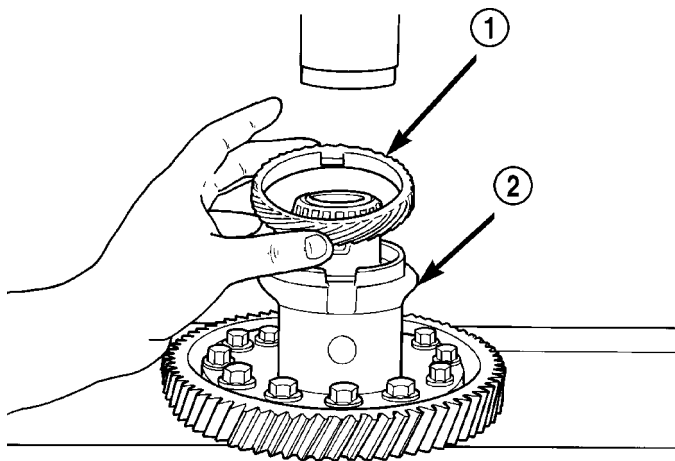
Install Differential Bearing Cone to Ring Gear Side
